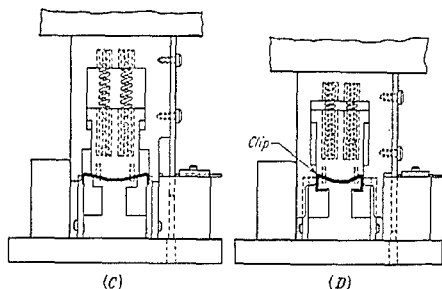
Die of Fig. 16-12: (C) partial stroke, four bends completed; (D) end of stroke, sliding blocks withdrawn, all bends completed.
